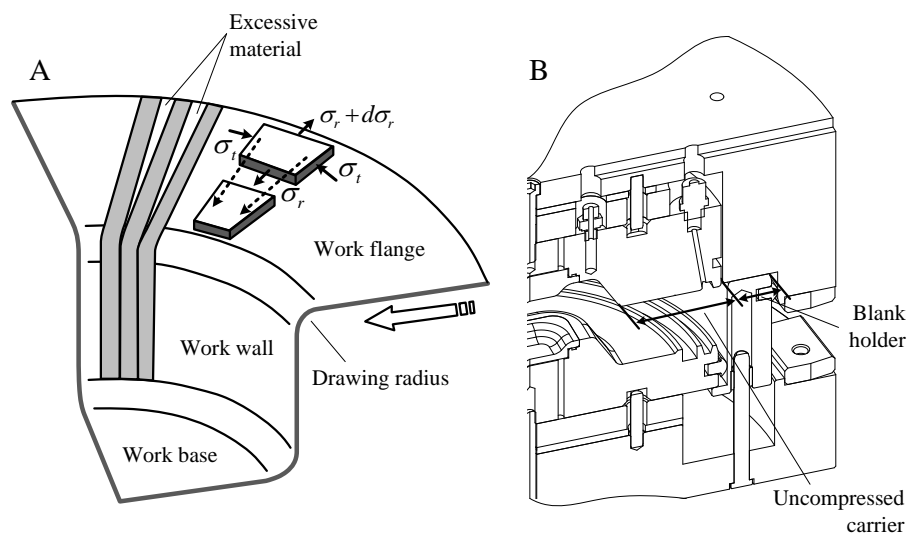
Wrinkling in work flange during deep drawing due to compressive stress (A; adapted from [92, p. 197-200]). Between blank holder and the area of deformation inside the CIP tool remains a free length in which the carrier is uncompressed, which could lead to buckling (B)
